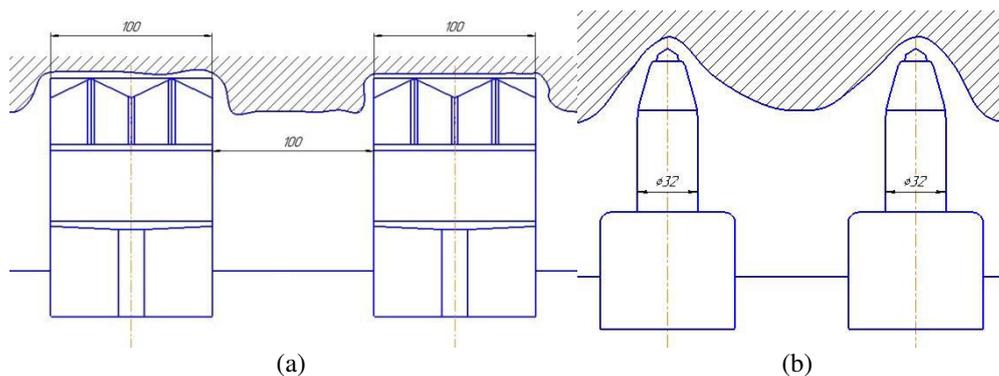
The Cutter Head Cutting Pattern: a - factory cutting pattern; b- improved cutting pattern.
